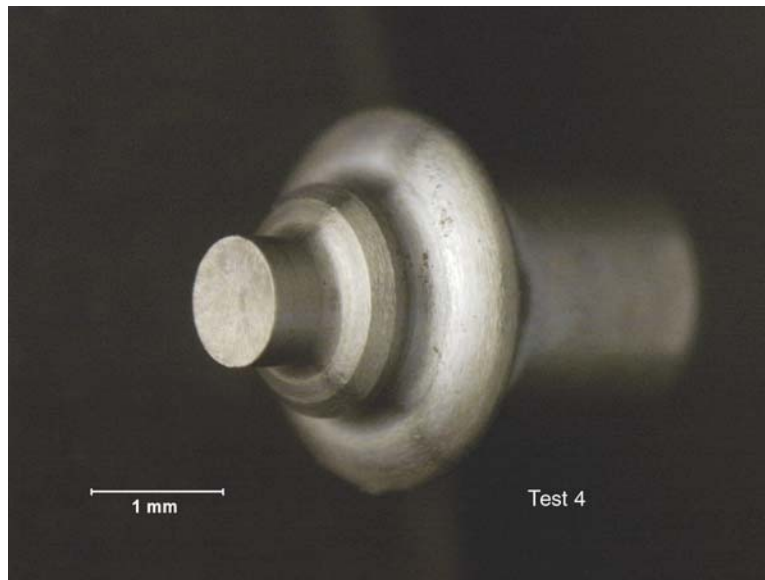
AF7868 SPK, Fuel Injector Control Valve
